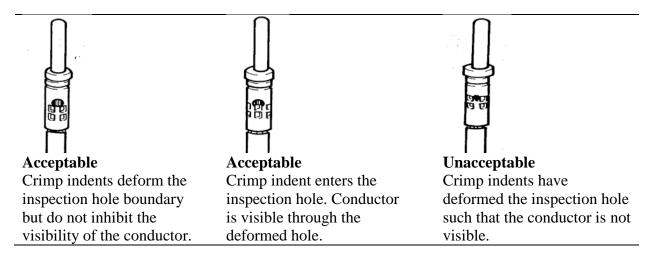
Examples of acceptable crimp indents and their location with the inspection hole.
